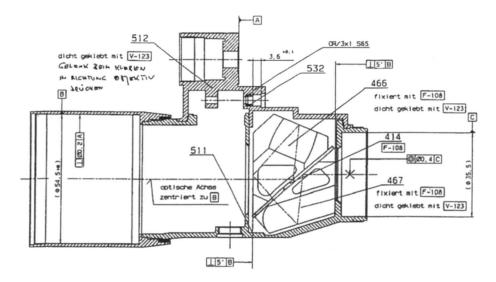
Drawing of a roof prism mounted in the manner of Fig. 7.15. (From Seil.¹⁷)
